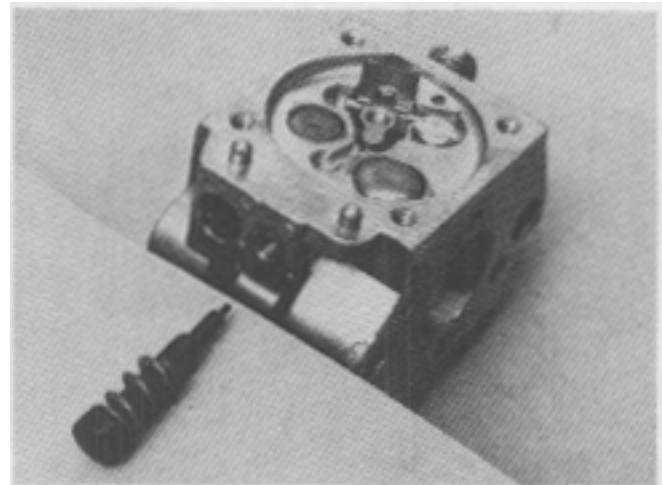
Remove needle valve. Check for wear or damage. Replace if necessary.
